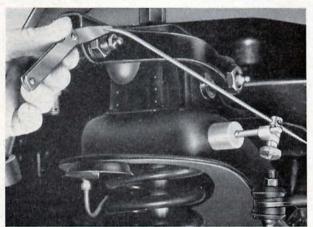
Checking the upper arm for slackness on the fulcrum shaft
